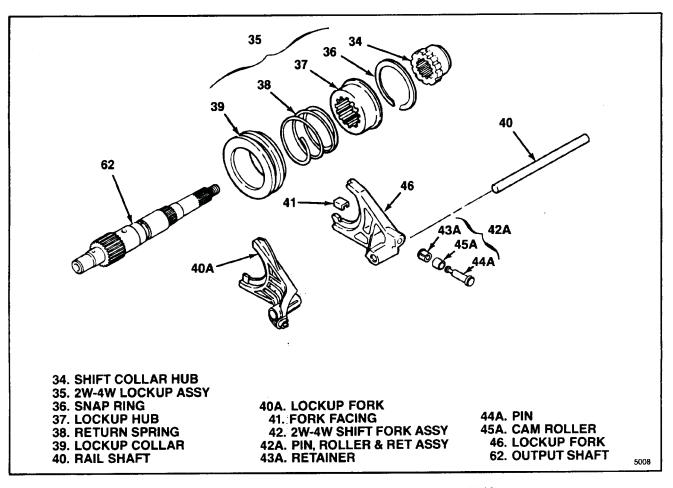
Lockup Shift Parts (Mechanical Shift)
